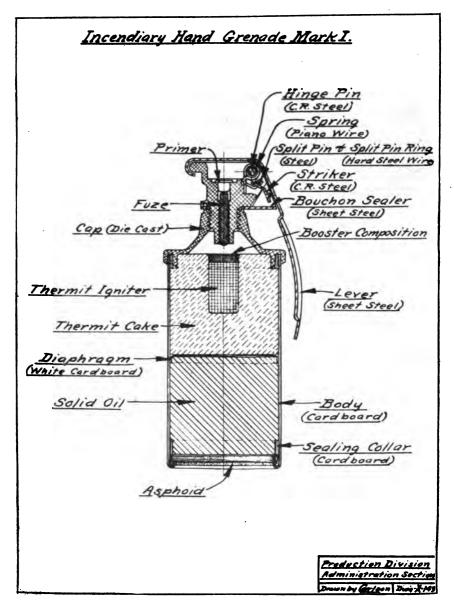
Sectional view of incendiary hand grenade, Mark I.
